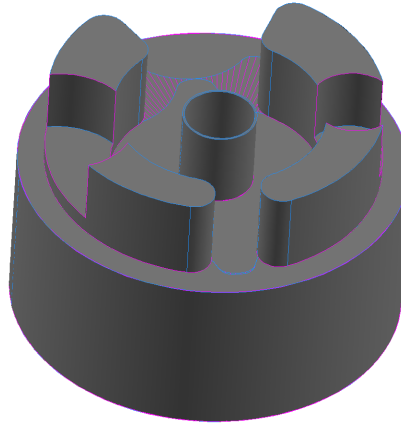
Shaft Side Upper and Shaft Side Lower Gaps
